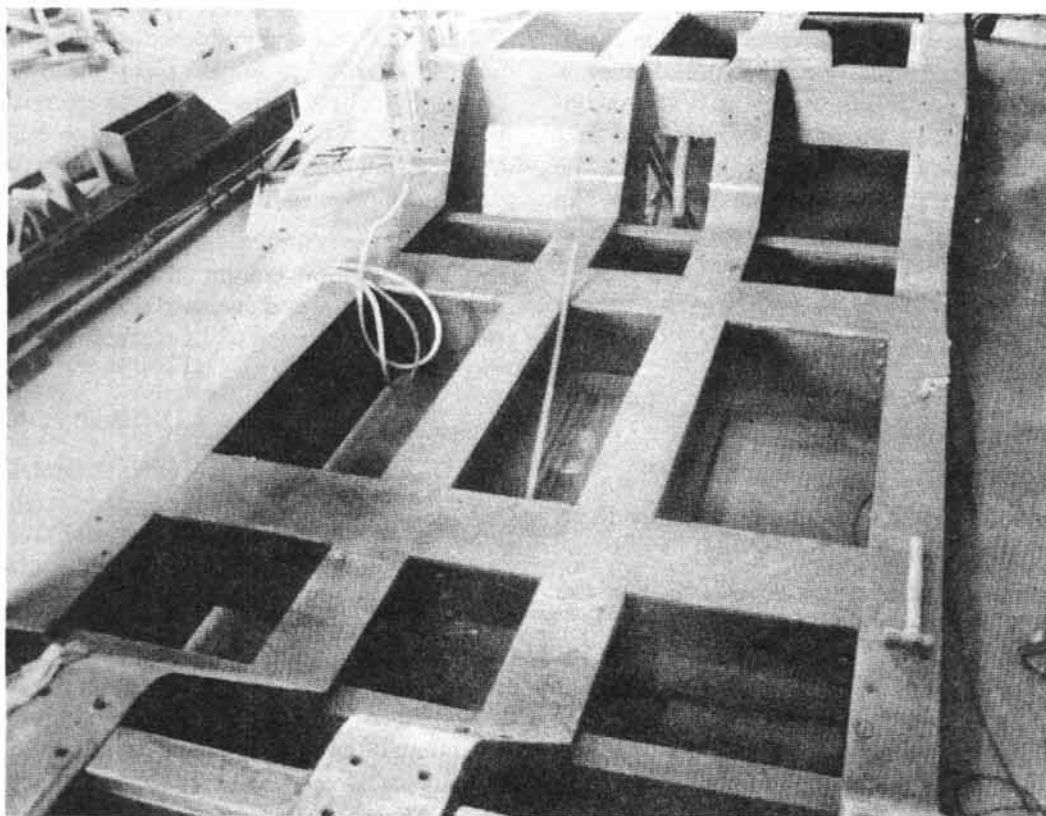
Girder work beneath cladding. Contamination is confined to the well section, and located mainly at the joints.
